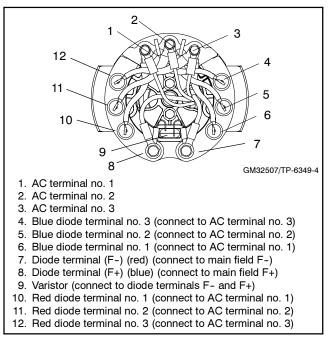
Rotating Rectifier Assembly Hub Electrical Connections
